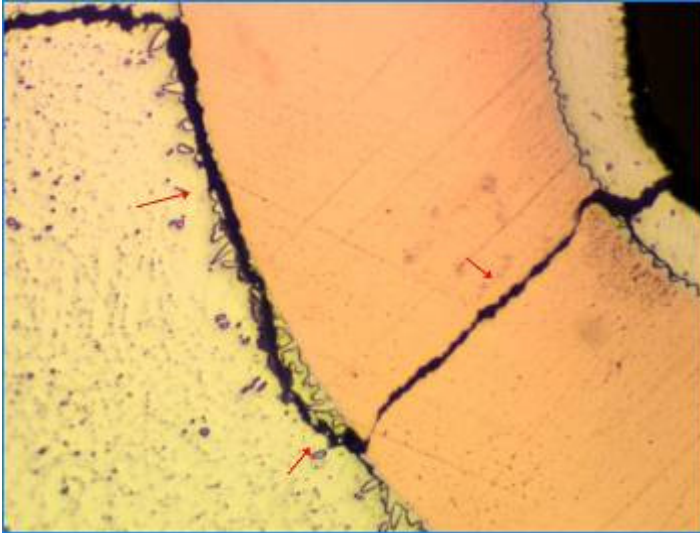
cross section, SN65, U41, right lead and solder crack, 400x
